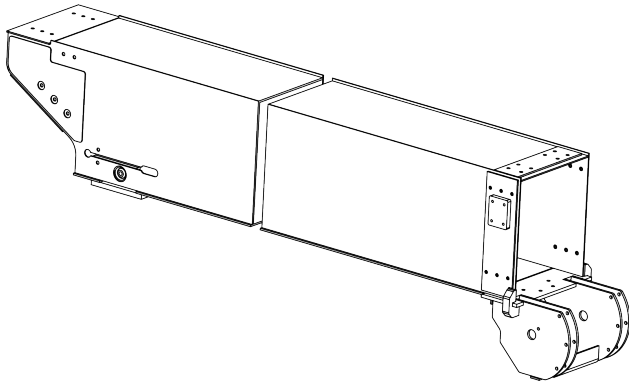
Boom Assembly Torque Values - Sheet 4 of 4
